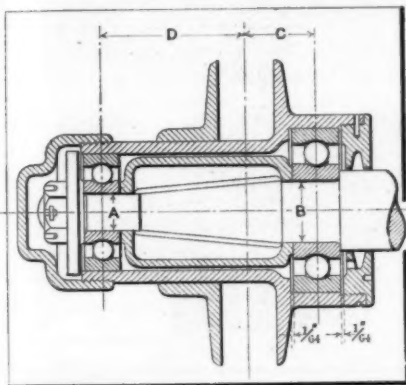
Hess-Bright type of hub with annular type ball bearings and safety spacer which serves as a preventer bearing
